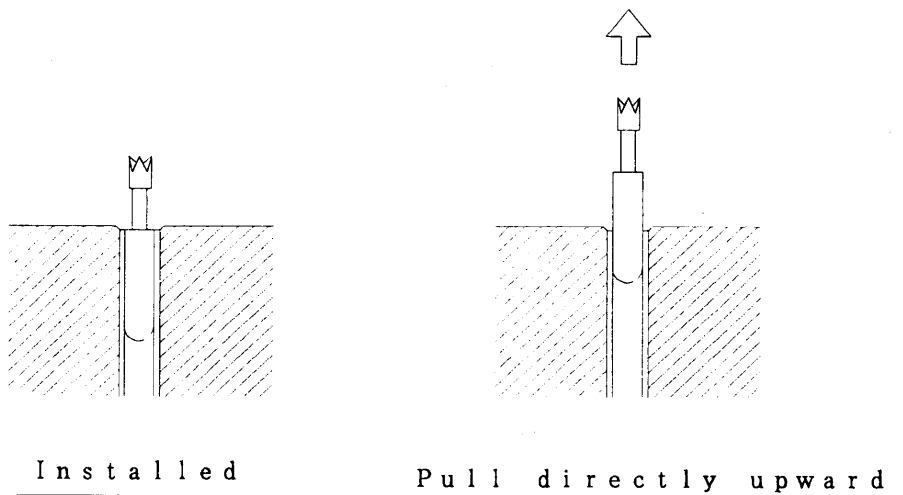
Replacing the electrical contacts of the Tooling Adaptor
